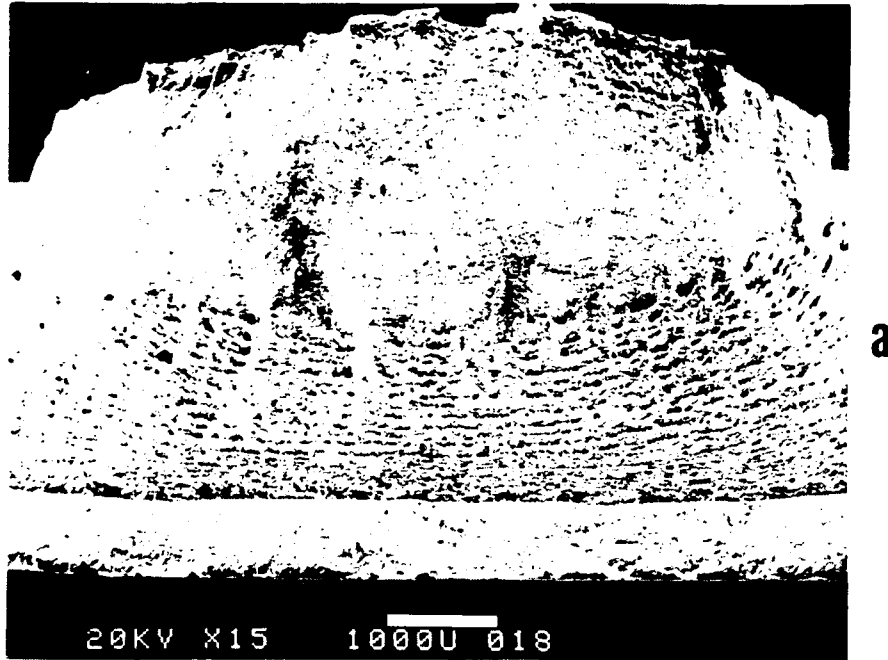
Fracture surface of 5086-H111 aluminum symmetric specimen showing the macroscopic roughness of the specimen After the fatigue crack a "wavy" region [shown better in (b)] and finally a shear lip at the end
